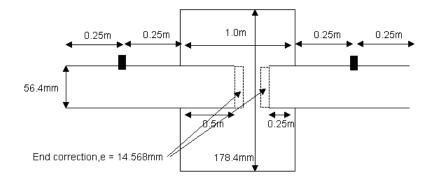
Chamber with Inlet and outlet pipe extensions
